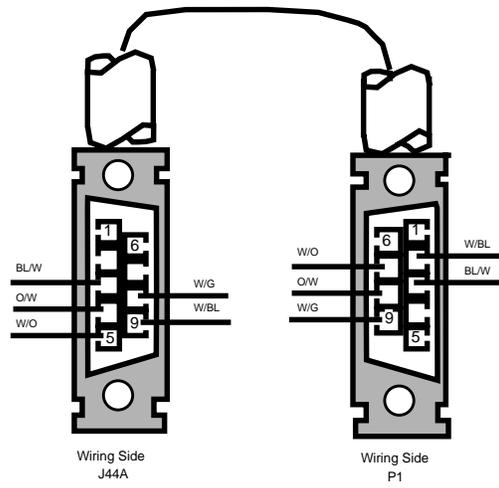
Cable Assembly ED7C723-34 Group 17
